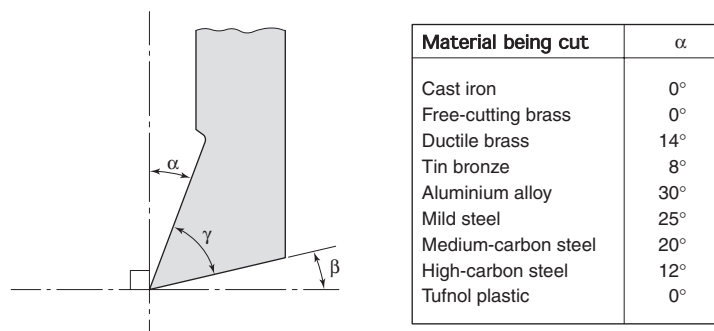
Cutting tool angles: α = rake angle; β = clearance angle; γ = wedge or tool angle
